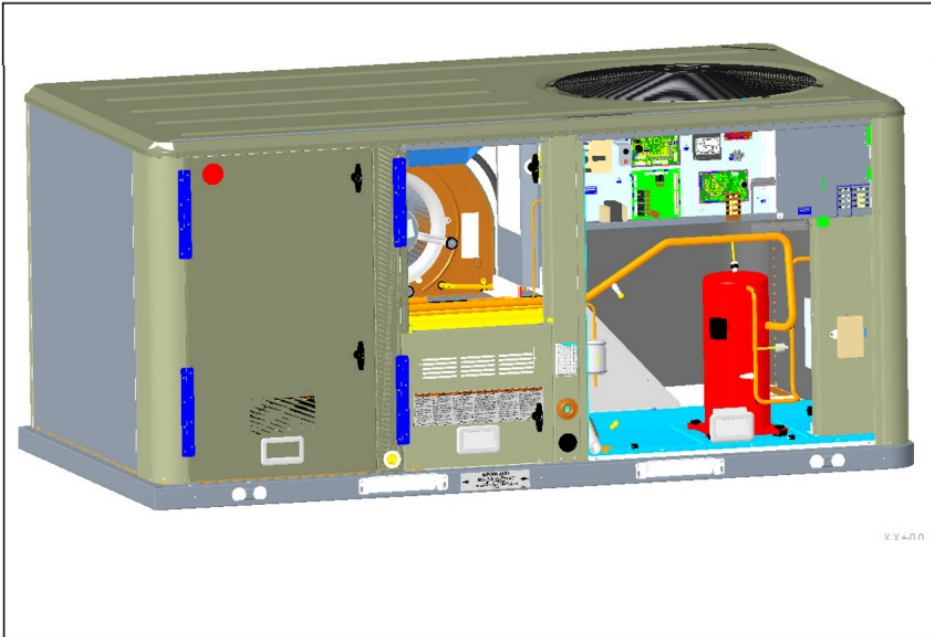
Precident™ – Drive and Interface Module Mounting Locations
